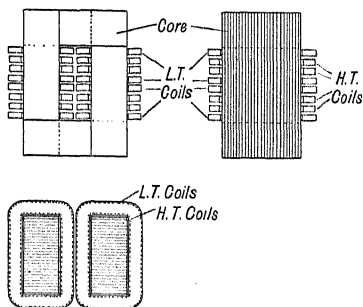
Outline of Single-phase Rectangular Core-type Transformer.
